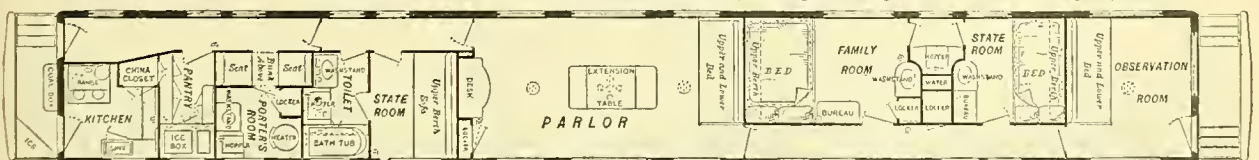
SECTIONAL PLAN OF PRIVATE CAR, ELLSMERE, BUILT BY THE WAGNER PALACE CAR COMPANY.
